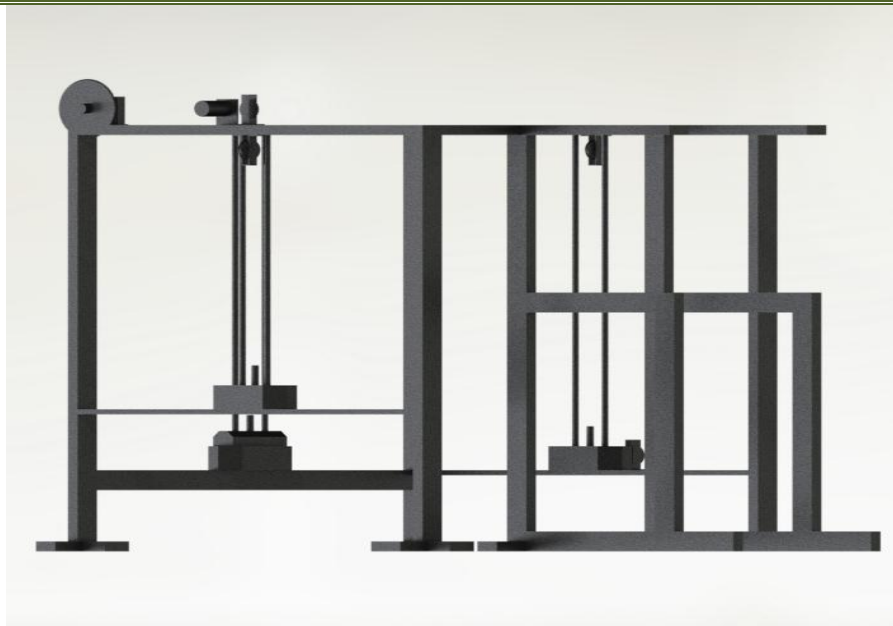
B.2: 3D model of the fabricated equipment done in solidworks.
